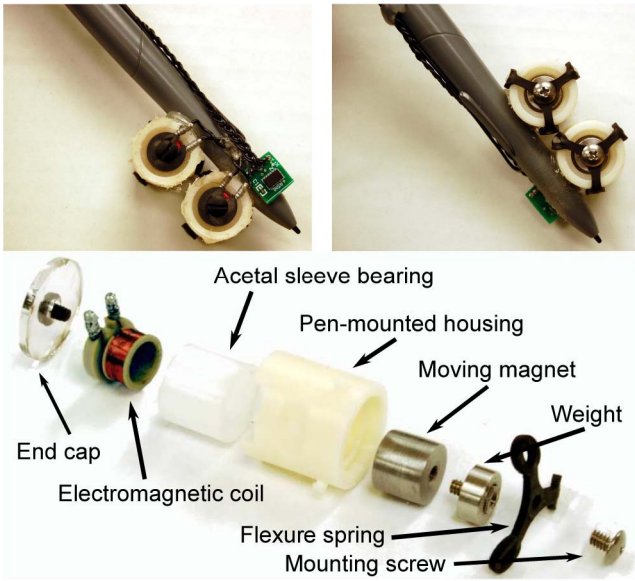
Mounted (top) and exploded (bottom) views of our voice coil actuators. The end cap attaches the electromagnetic coil to the housing. Inside of the housing is a low-friction acetal sleeve bearing that the moving magnet runs within. The outside of the housing has three mounting hooks that the rubber flexure spring is attached to. A mounting screw fixes the center of the flexure spring to the moving magnet and weight.
